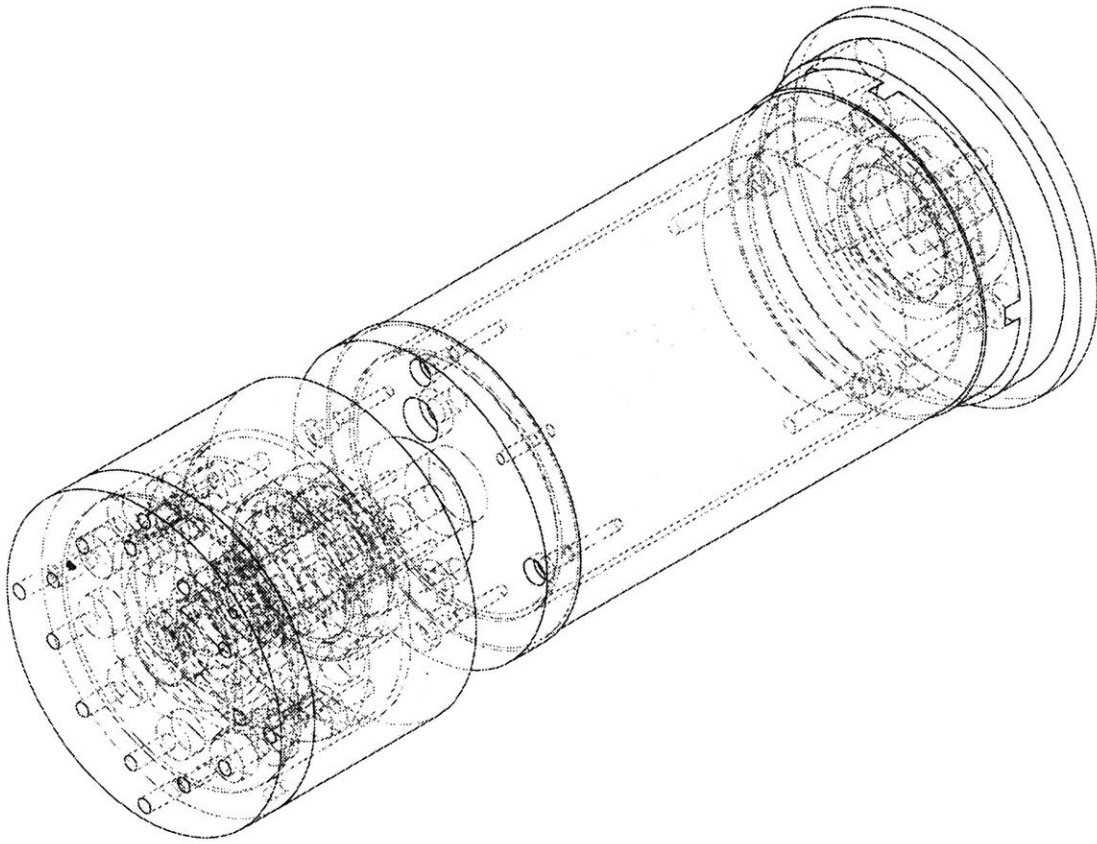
Differential Cycloidal Cam Actuator Prototype CAD
